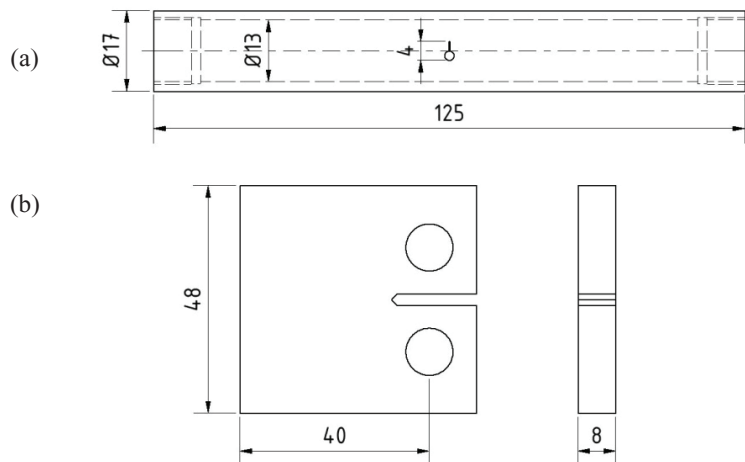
(a) Tubular specimen for 20 kHz ultrasonic experiments; (b) CT specimen used for servo-hydraulic experiments (dimensions in mm).
